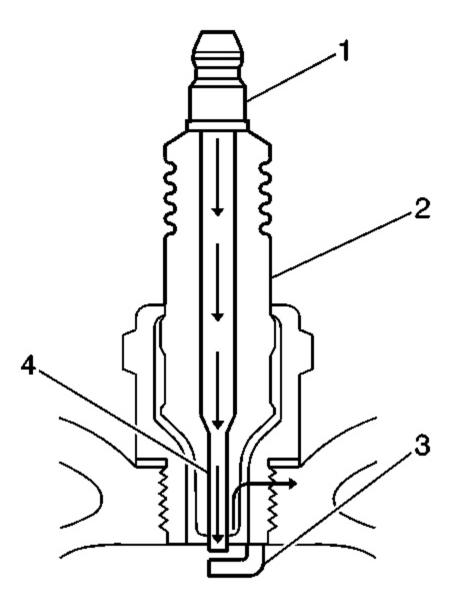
Inspecting Spark Plug For Improper Arcing Courtesy of GENERAL MOTORS CORP.
